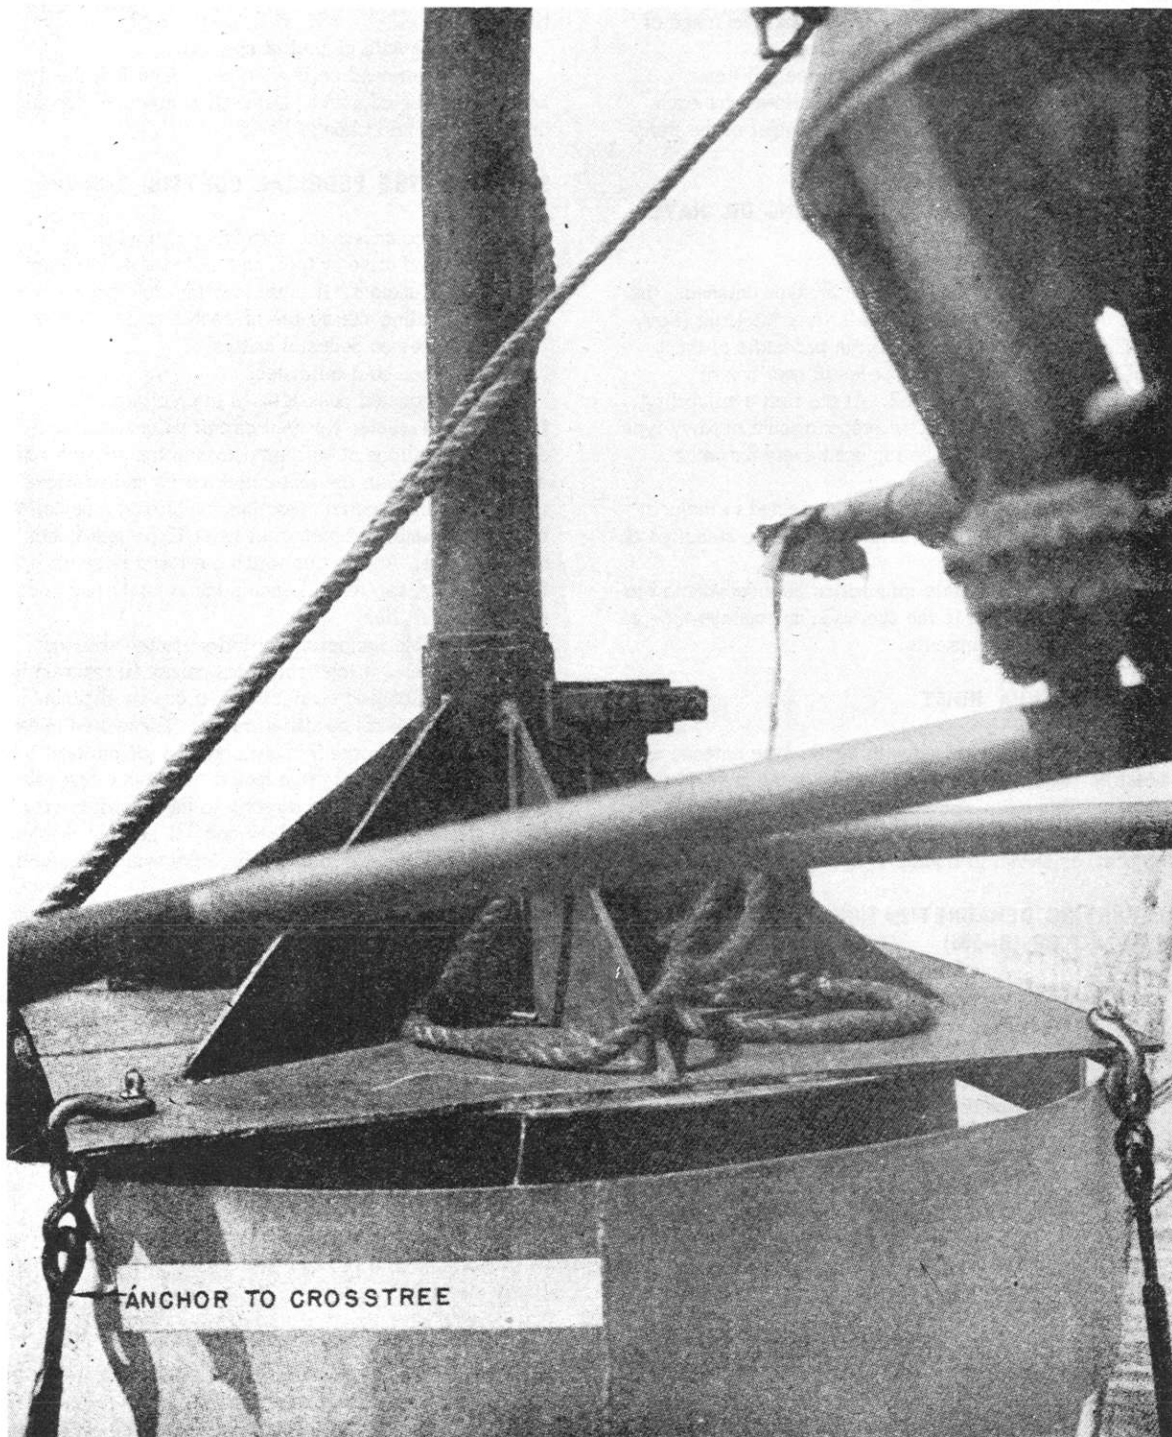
U. S. S. *Cavalier* supporting base for davit fabricated and welded to lookout station.
